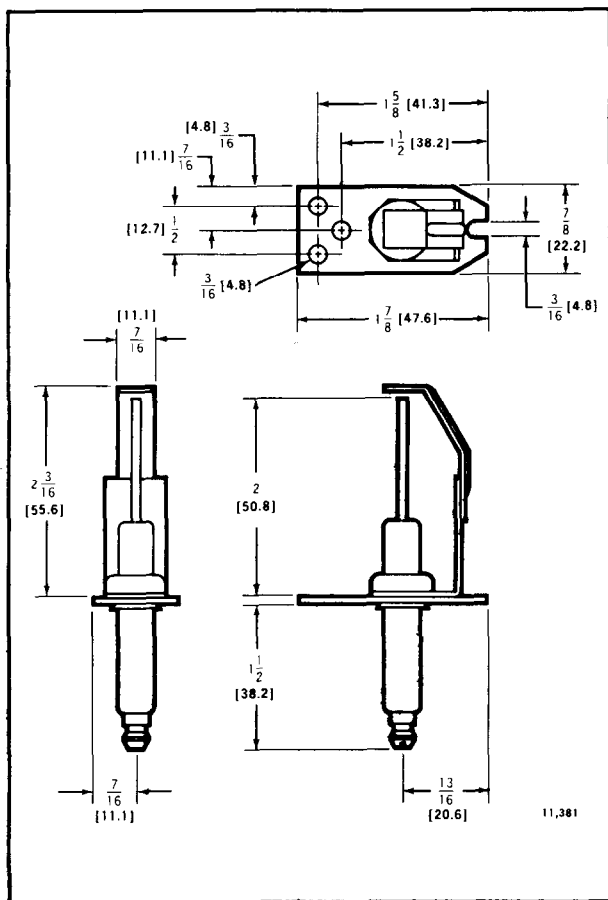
INSTALLATION DIMENSIONS IN in. [mm IN BRACKETS] OF Q347A.
